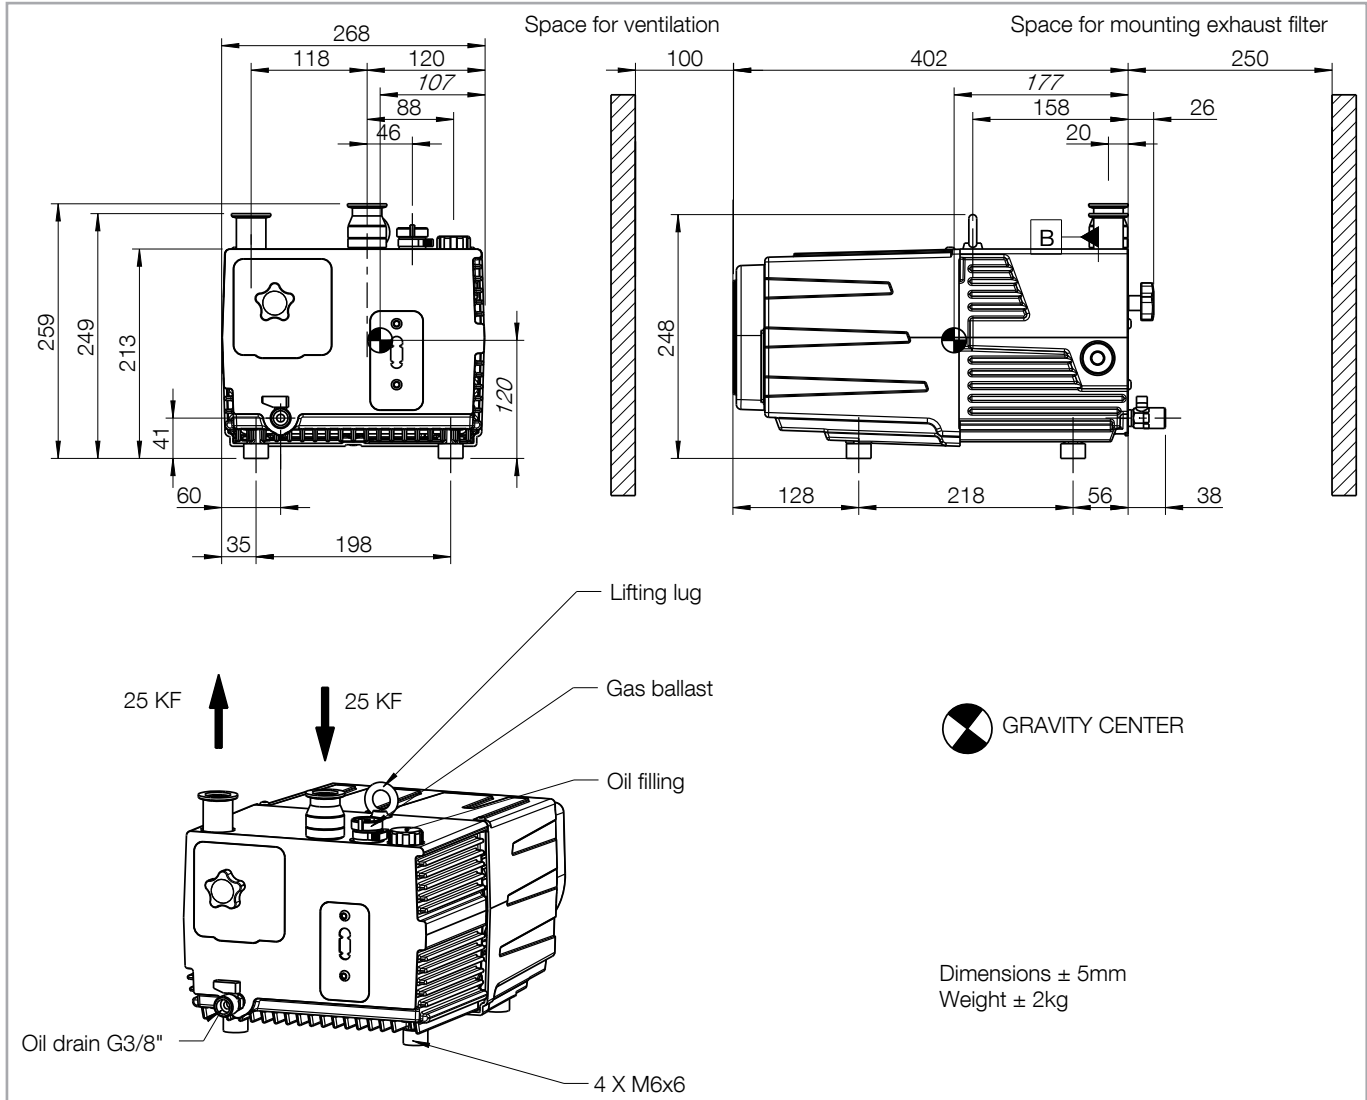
Dimensional drawing of SV16 DI and SV25 DI
